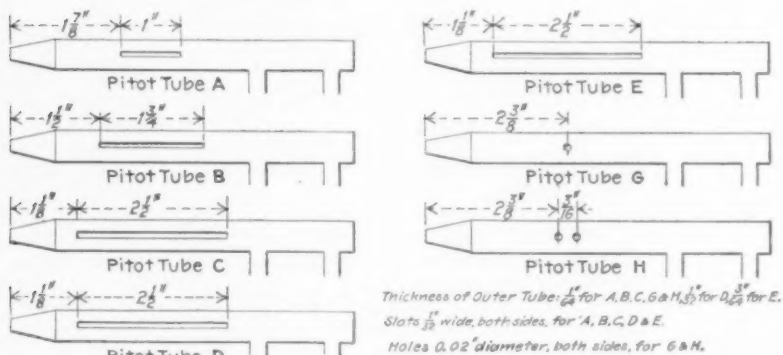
SKETCHES OF PITOT TUBES A TO H SHOWING DIMENSIONS OF STATIC OPENINGS
